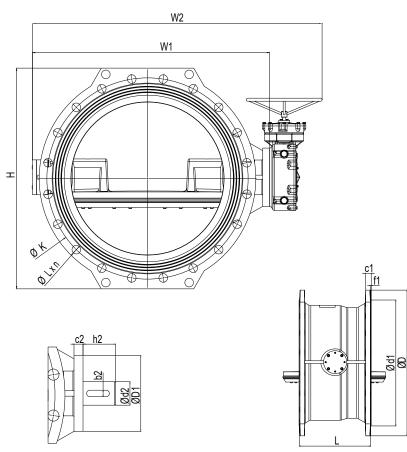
Sectional drawing PN 10 DN 1200 - 2200
